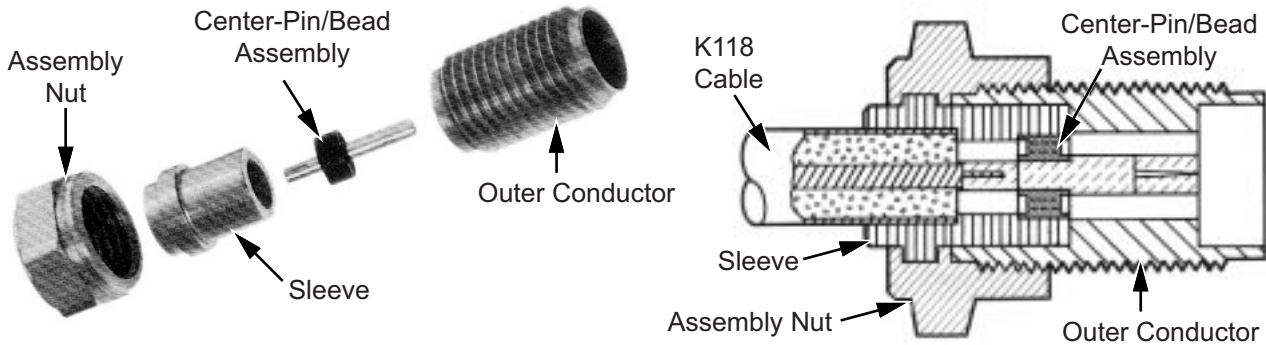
[K101F-R or EK101F-R](#) Assembly
